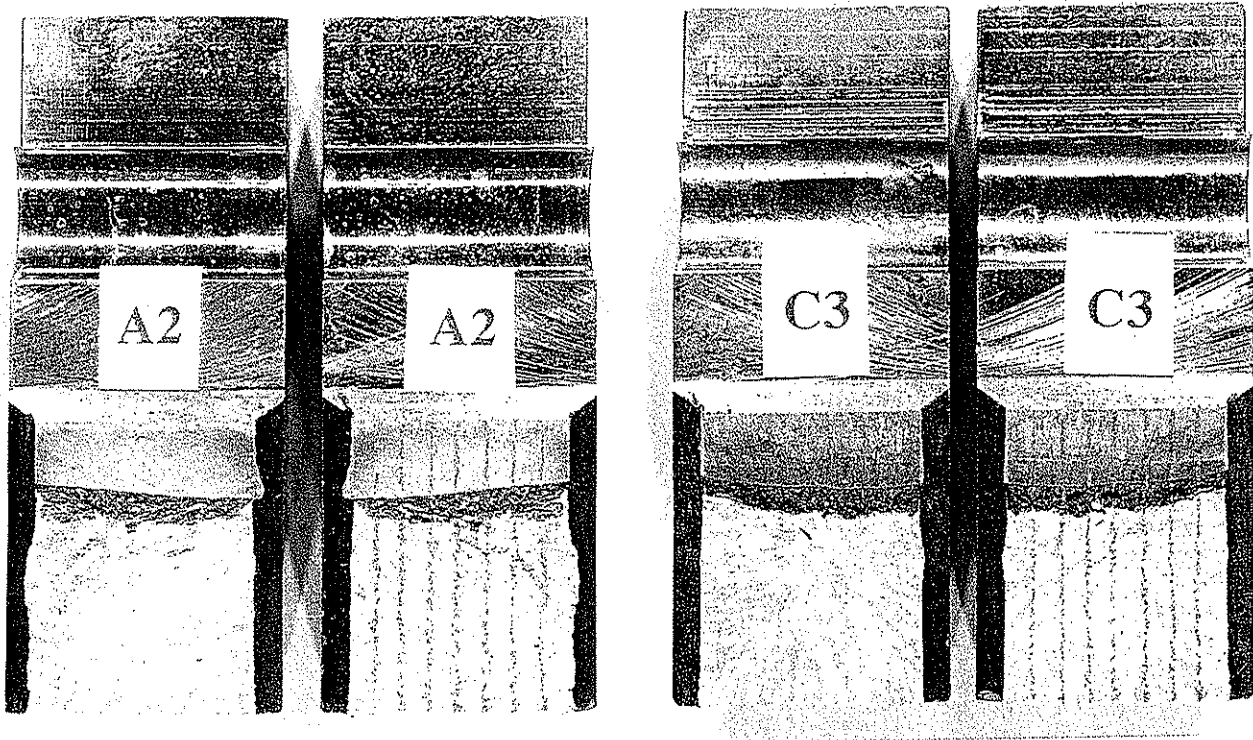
Typical Weld Metal CT Specimen Fracture Surface
